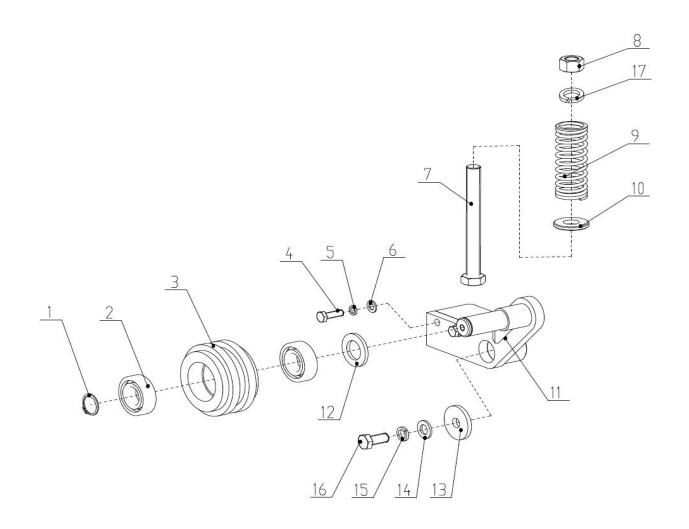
TENSIONER SET ASSEMBLIES
